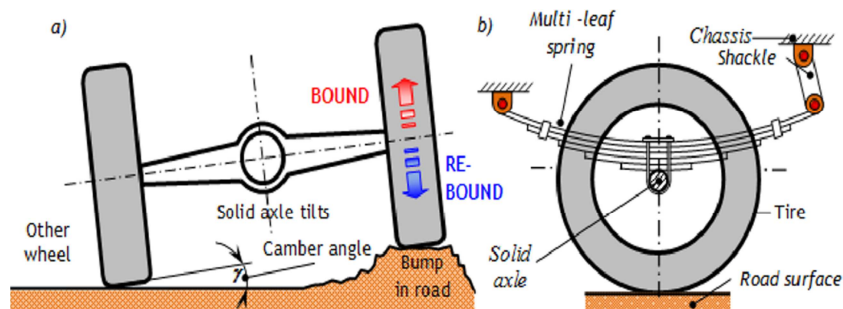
The Dependent Suspension System (solid axle); a) front view and b) Side View [23].
